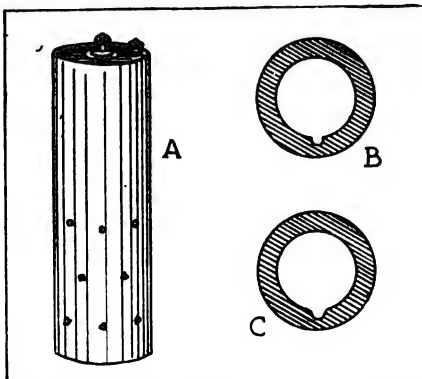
A, Illustrating How to Treat Dry Cell for Renewal; B, Incorrect Shape of Oil Groove; C, Correct Form.
